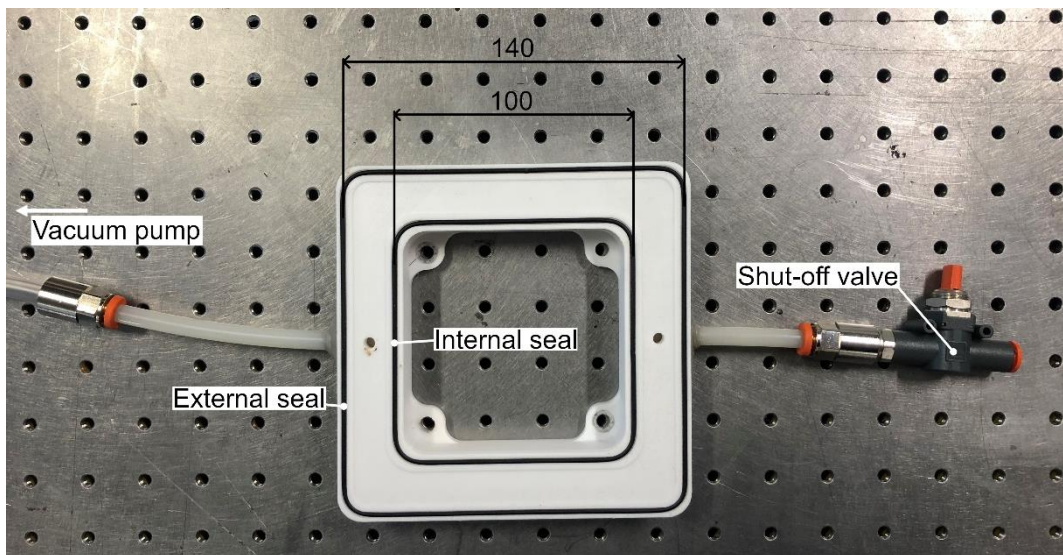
Clamping device: dimensions and details of the vacuum system.
